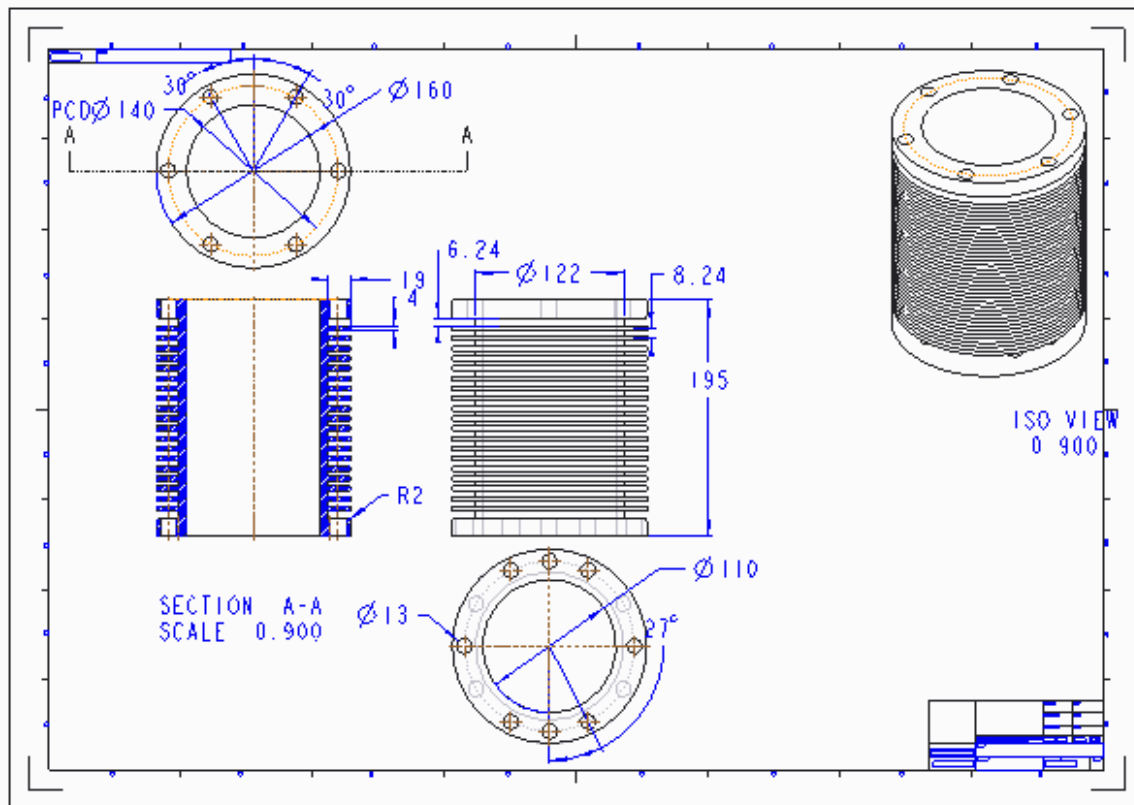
Drawing Specifications of a diesel engine cylinder fins
